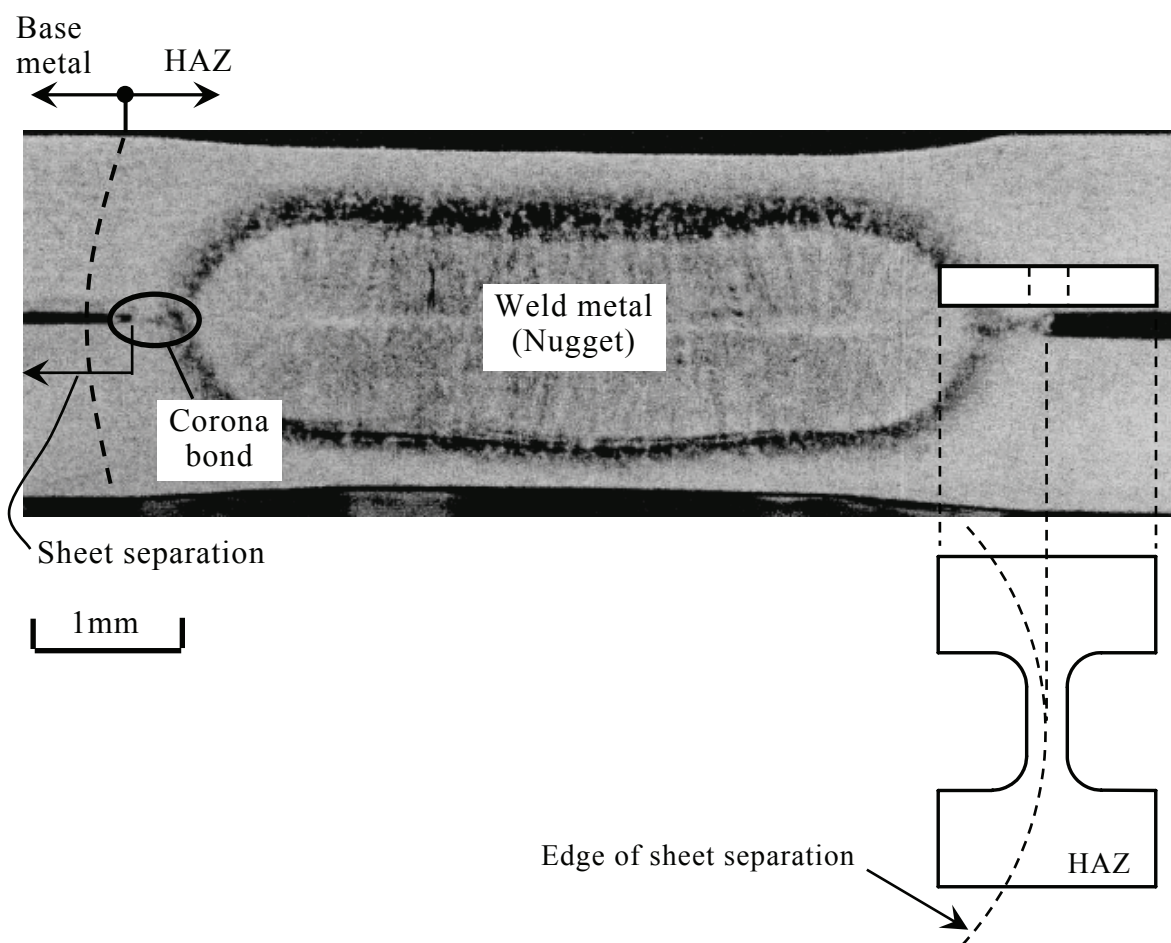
Cross section of spot weld and sampling location of HAZ small specimen.
